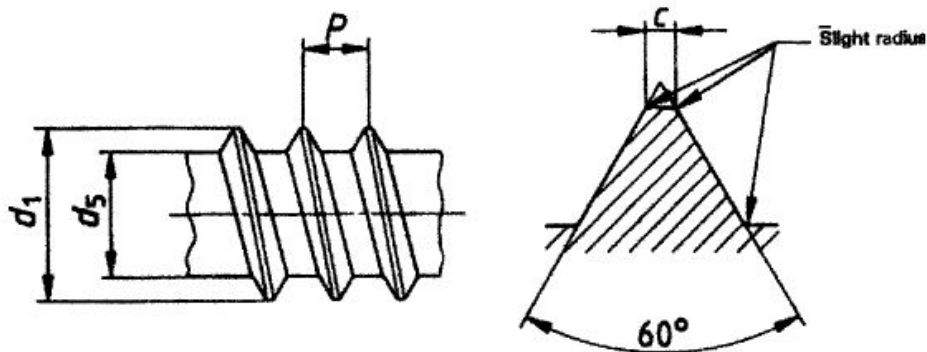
Schematic of HC Screw Thread Dimensions (Table A6.2)
